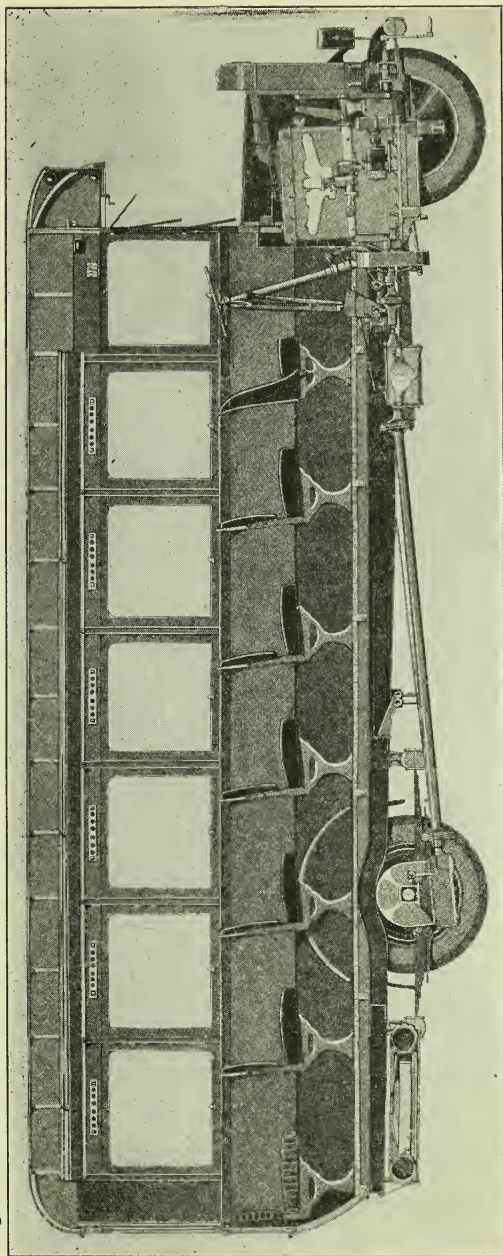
SECTIONAL VIEW OF THE TYPE-J BUS
